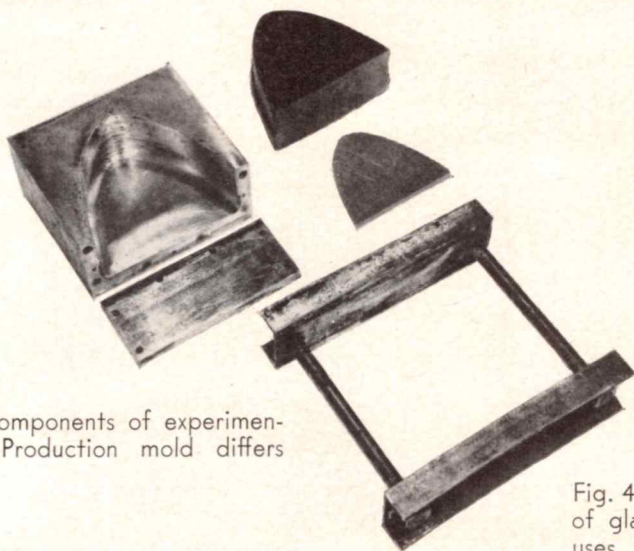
Components of experimental mold. Production mold differs slightly.
